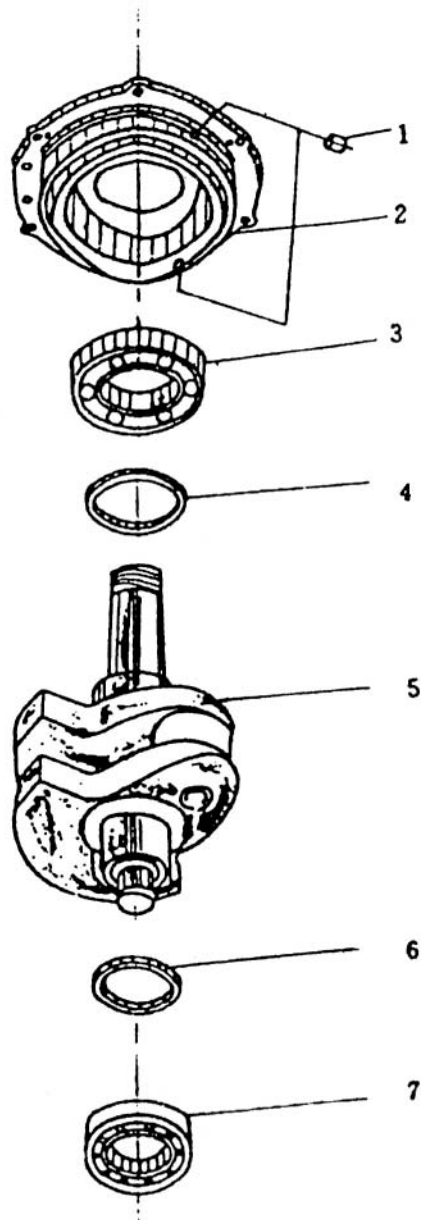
Fig. VI Flywheel, Crankshaft and Balancing Mechanism-I
